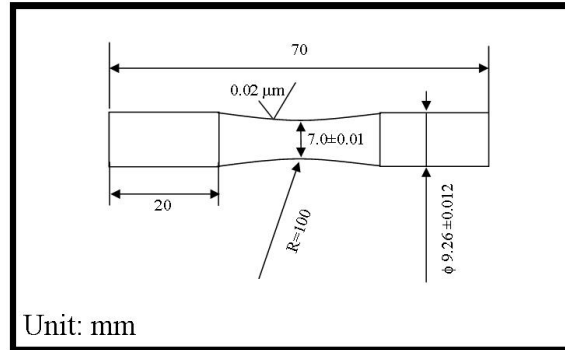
Shape and dimension of the AZ31B extrusion specimens
